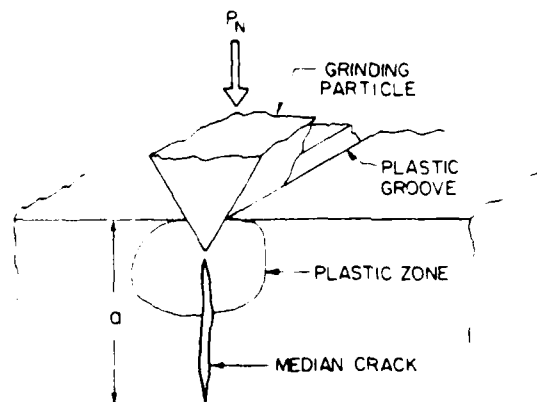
The median cracking that accompanies the grinding of ceramic surfaces
